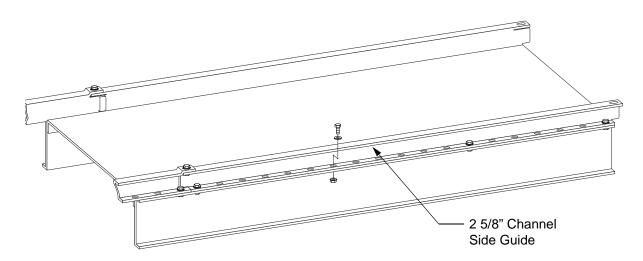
Channel Side Guides, 2 5/8" Channel Shown, Direct Mounting
